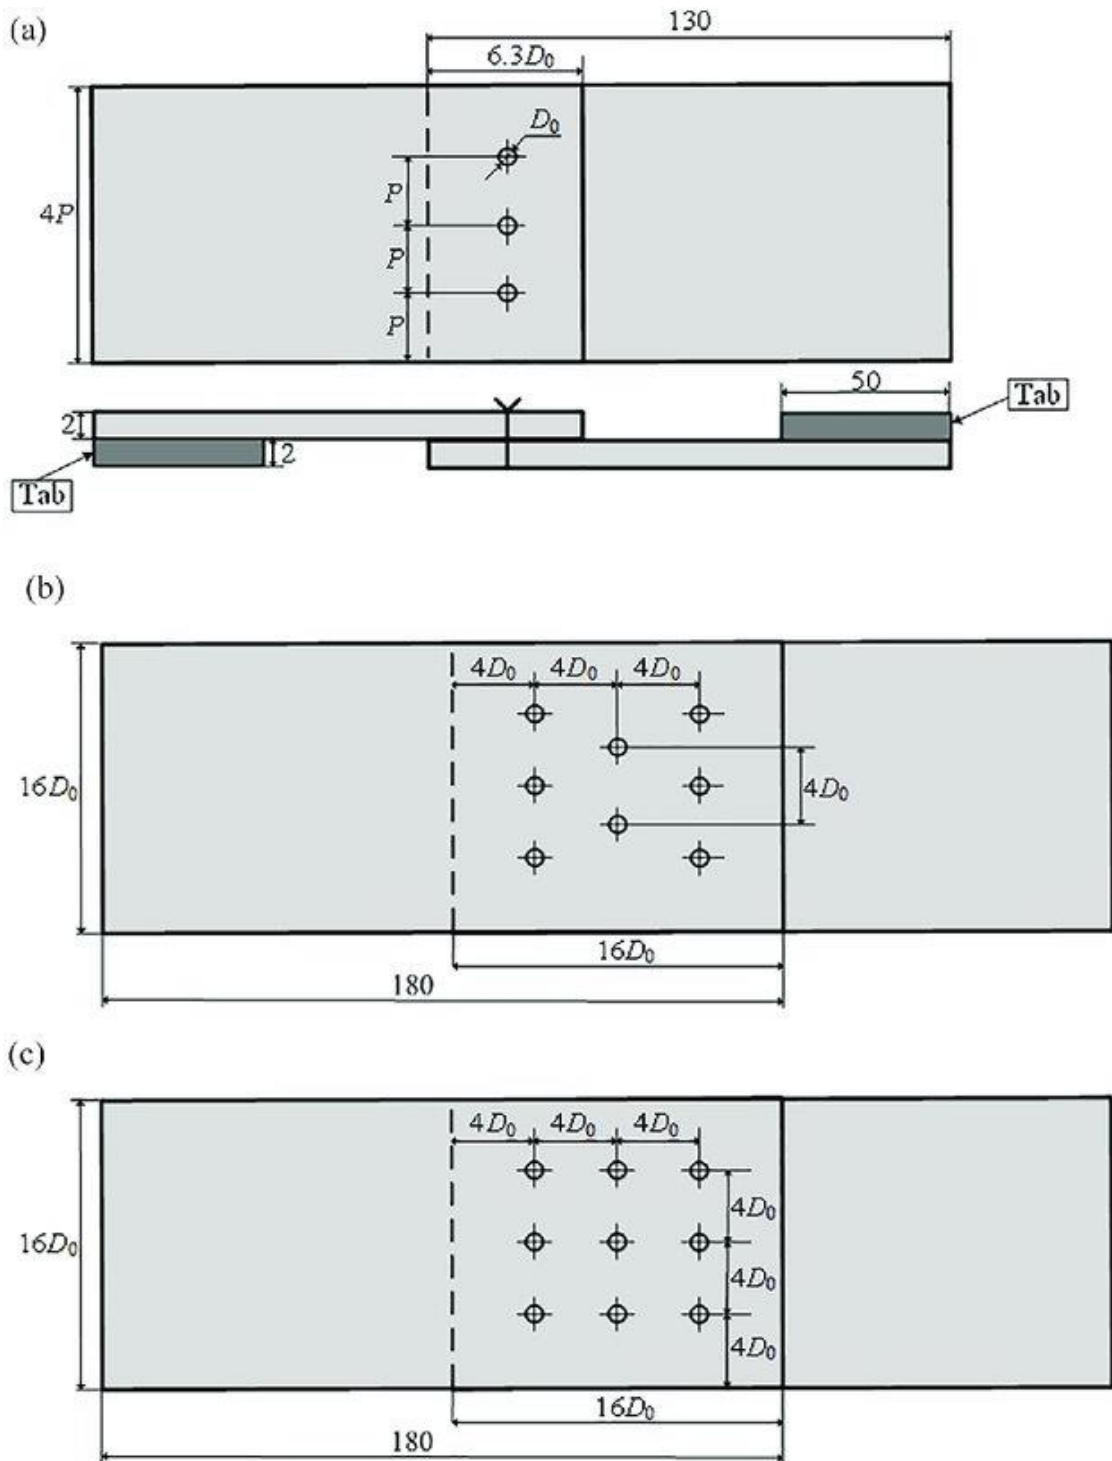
Riveted specimens in fatigue tests: a - single-row riveted lap joint; b - triple-row riveted lap joint with staggered riveting; and c - triple-row riveted lap joint with in-line riveting
